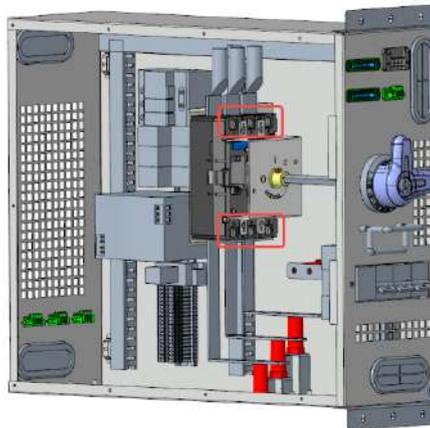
44 Remove the copper busbar and cable connected to the circuit breaker
